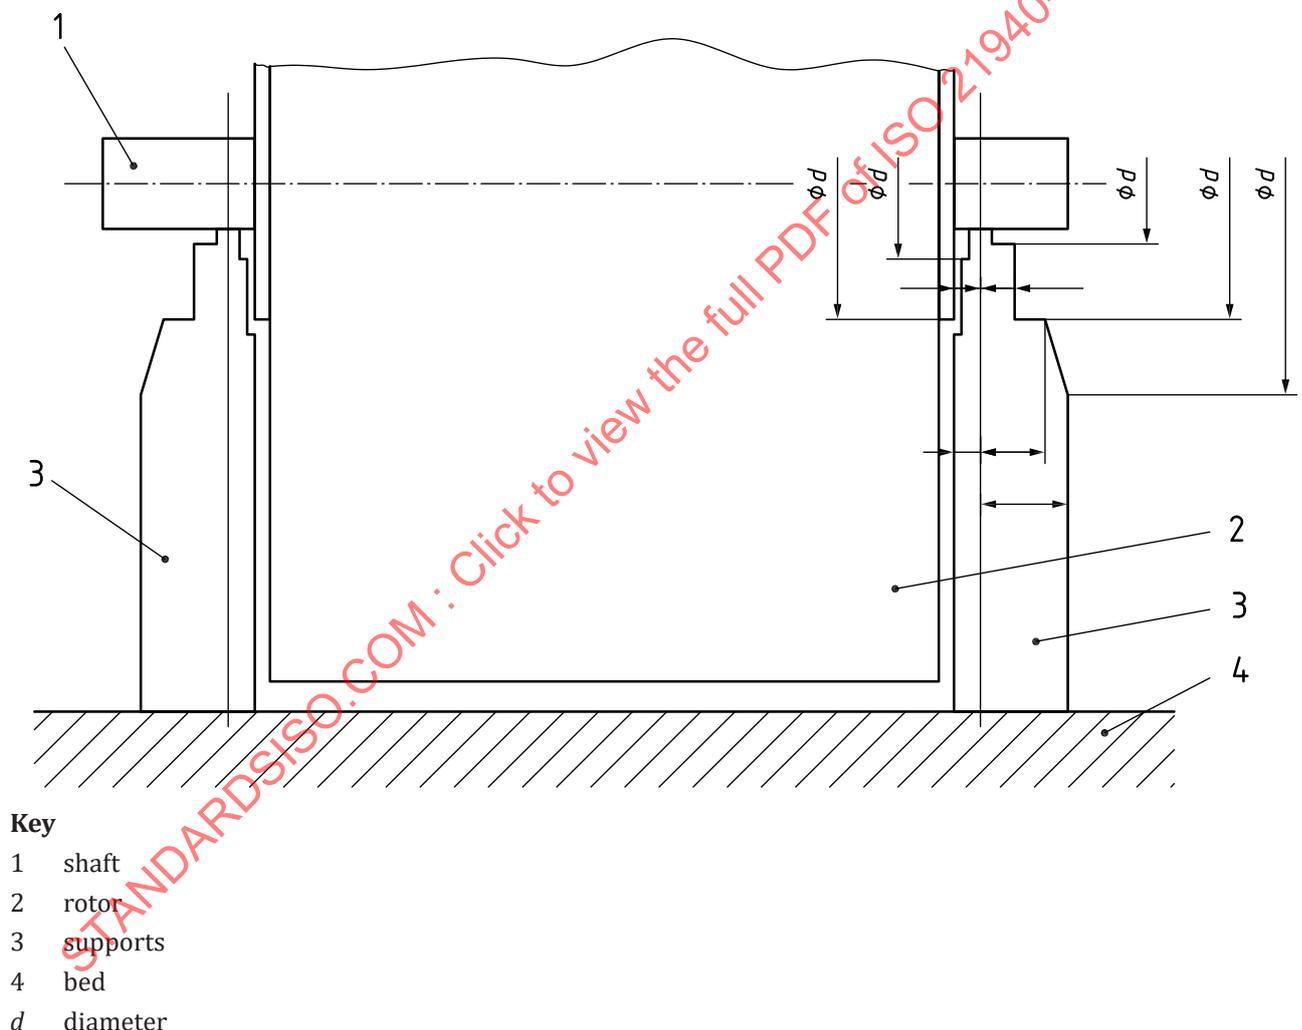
Example of a machine support drawing, illustrating rotor envelope limitations
